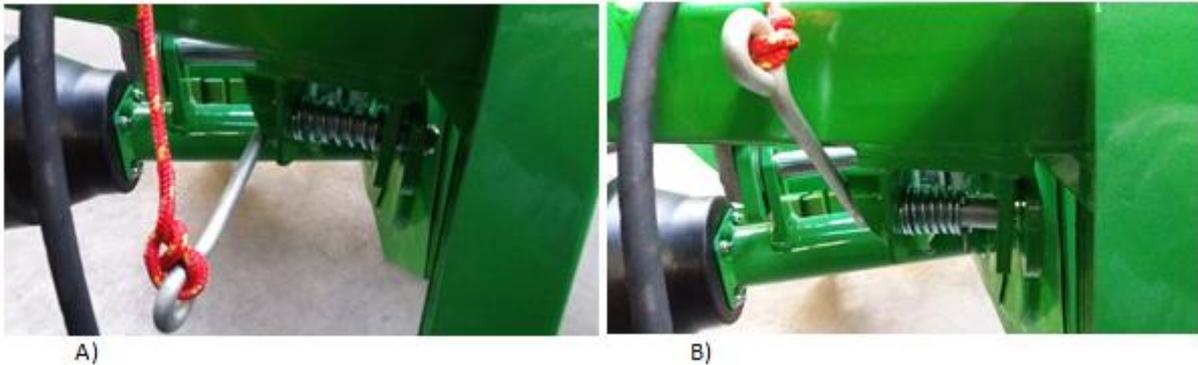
Suspension frame locking pin: (A) inside the clevis hole (B) removed from the clevis hole
